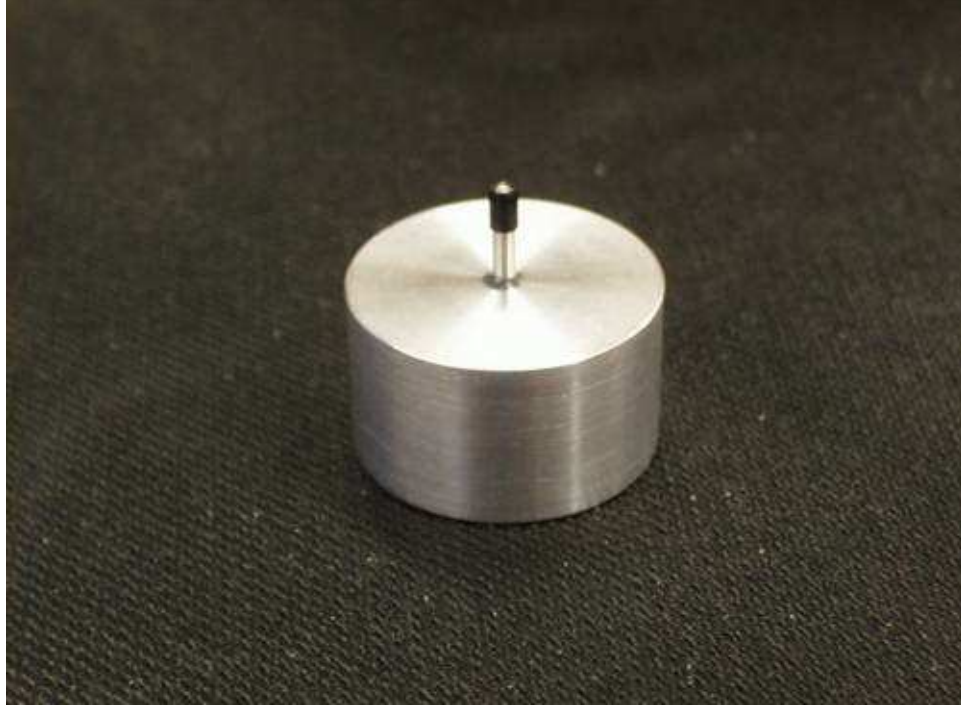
Implement used to hammer old tuning fork sensors out of the target endpiece.
